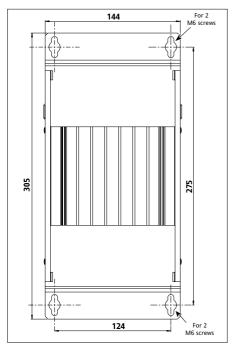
Bulkhead mounting - 80 A to 100 A units
